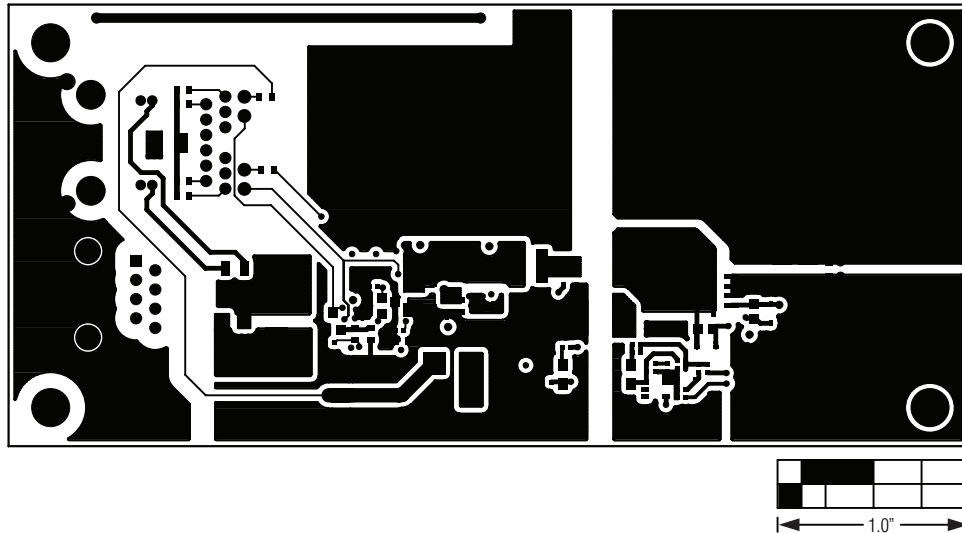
MAX5974C EV Kit PCB Layout—Solder Side
